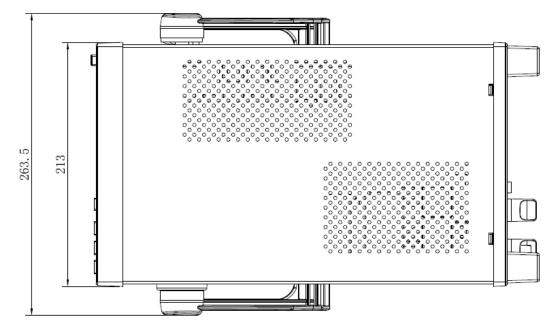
Mechanical dimension drawing of PA310 power meter (top view)
